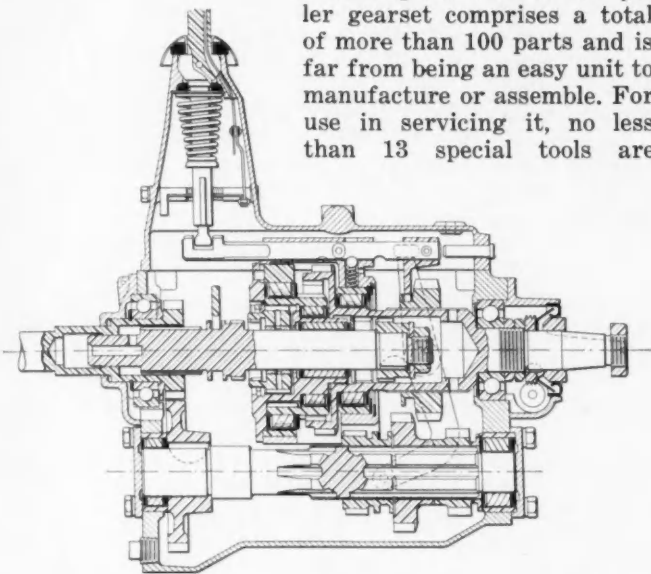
DETROIT GEAR & MACHINE CO. FOUR-SPEED INTERNAL-GEARSET AS USED IN FRANKLIN CARS
